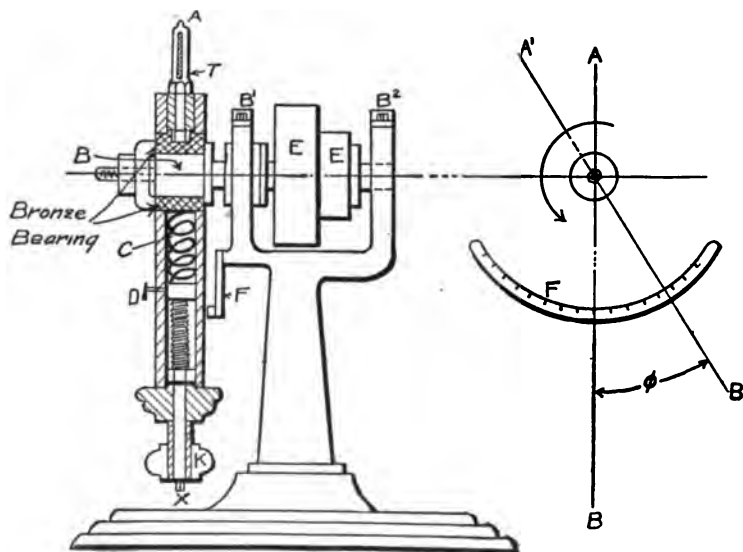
SEC. 6.—Outline drawing of Thurston railroad lubricant tester.
